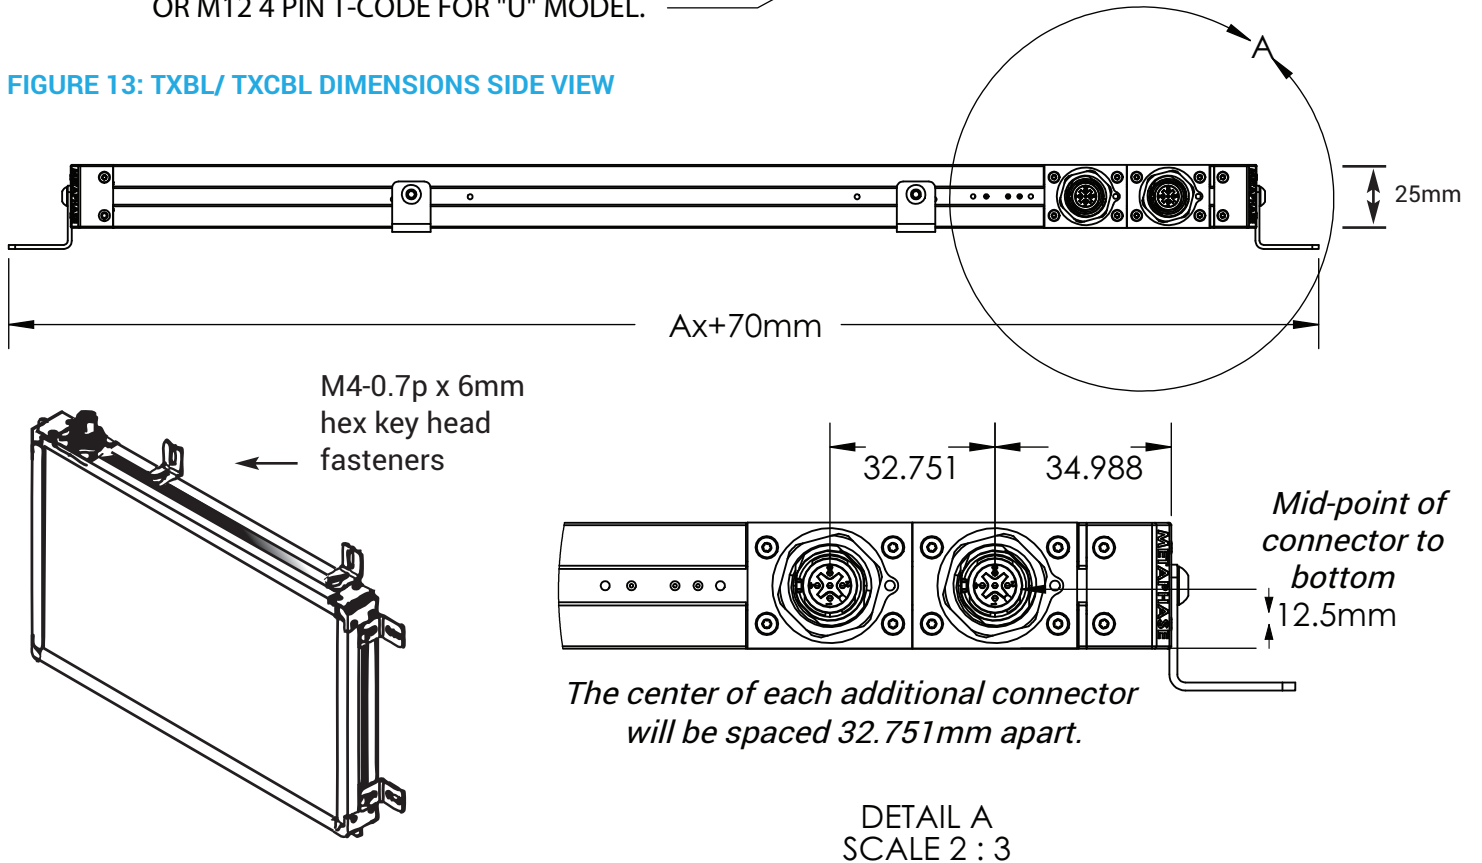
TXBL/ TXCBL DIMENSIONS SIDE VIEW
